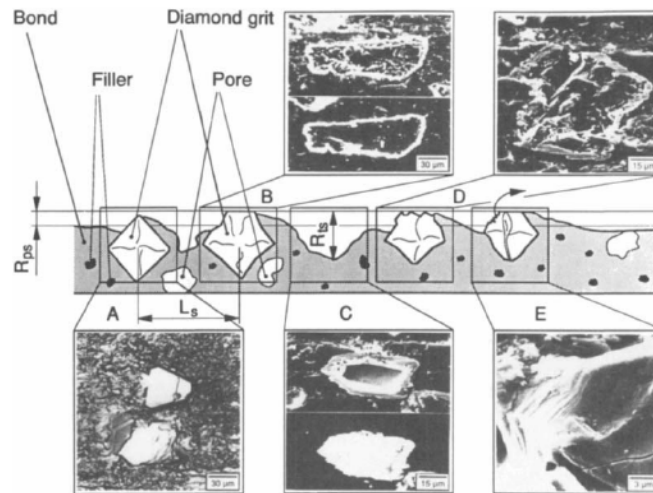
Tool wear mechanisms for the diamond grinding tool (Marinescu et al., 1998)
